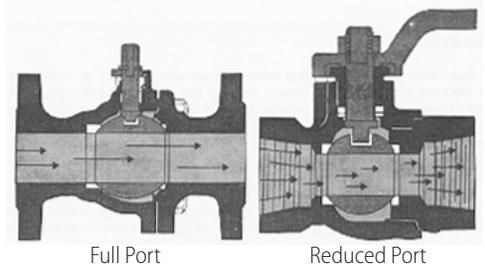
Full-Port and Reduced-Port Ball Valves
